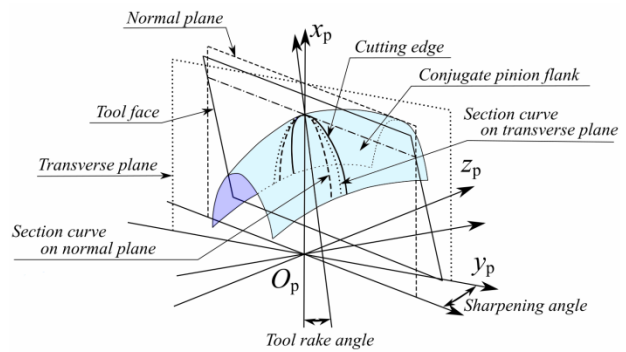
Calculation concept of a cutting edge on a barrel-shaped pinion conjugated to a gear tooth flank.
